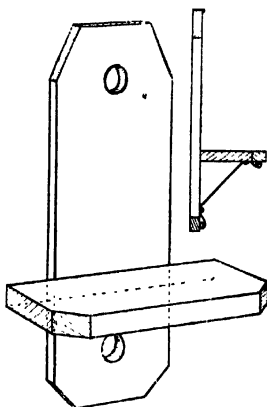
SMALL WALL-BRACKET (PERSPECTIVE VIEW)
